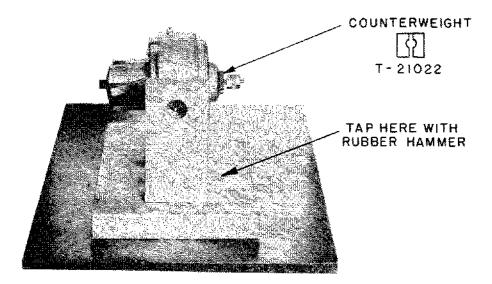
BALANCING THE GYPO HOUSING AND PENDULUM ASSEMBLY, HORIZONTAL POSITION, WITH COUNTERWEIGHT ON BALANCING STUD
